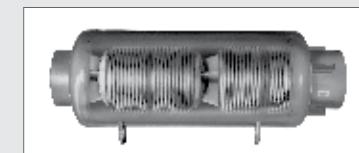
Pressure balanced axial expansion joint. Pressure-chamber principle
